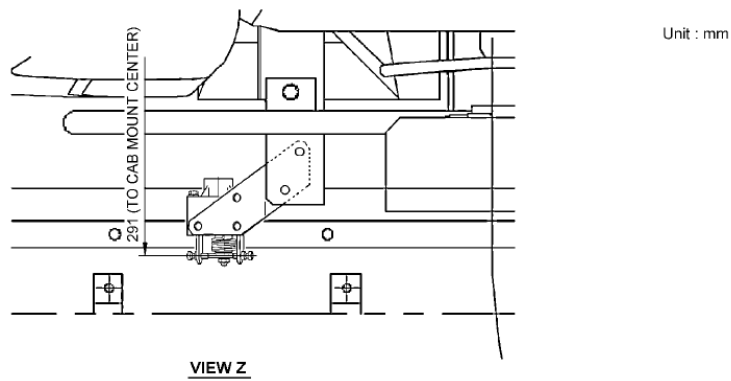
Engine Control Lever Installation Dimension (GKB, GWB)
